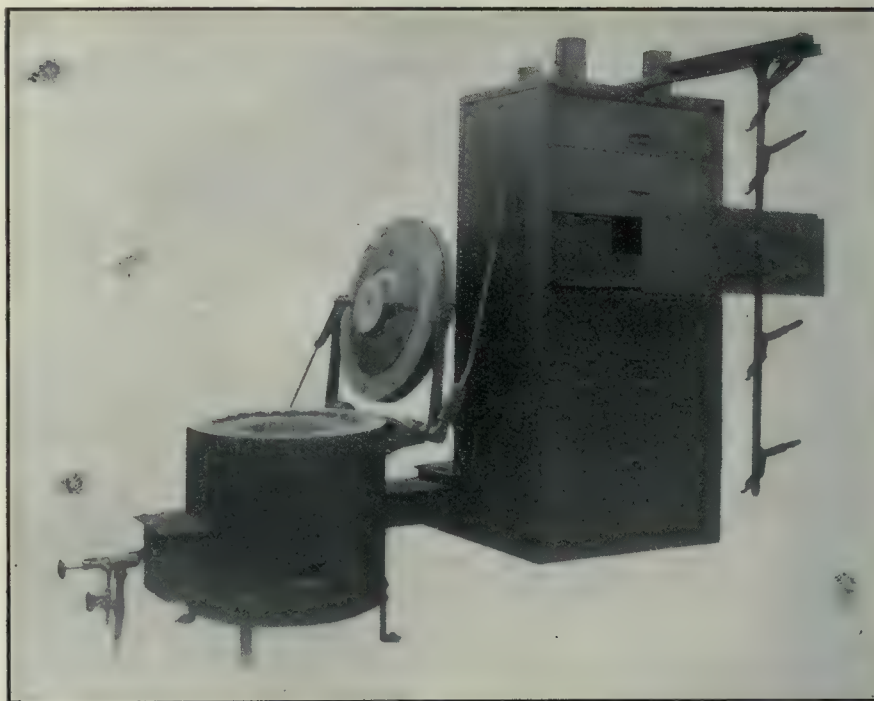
Steele-Harvey Melting Furnace in Which the Waste Heat is Utilized for Heating a Core-Oven.
